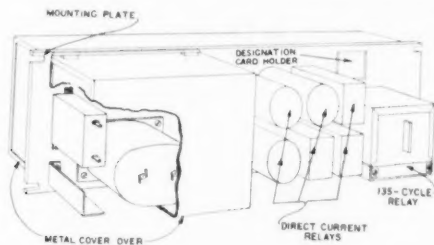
Typical Assembly of 135-Cycle Composite Ringer Set
